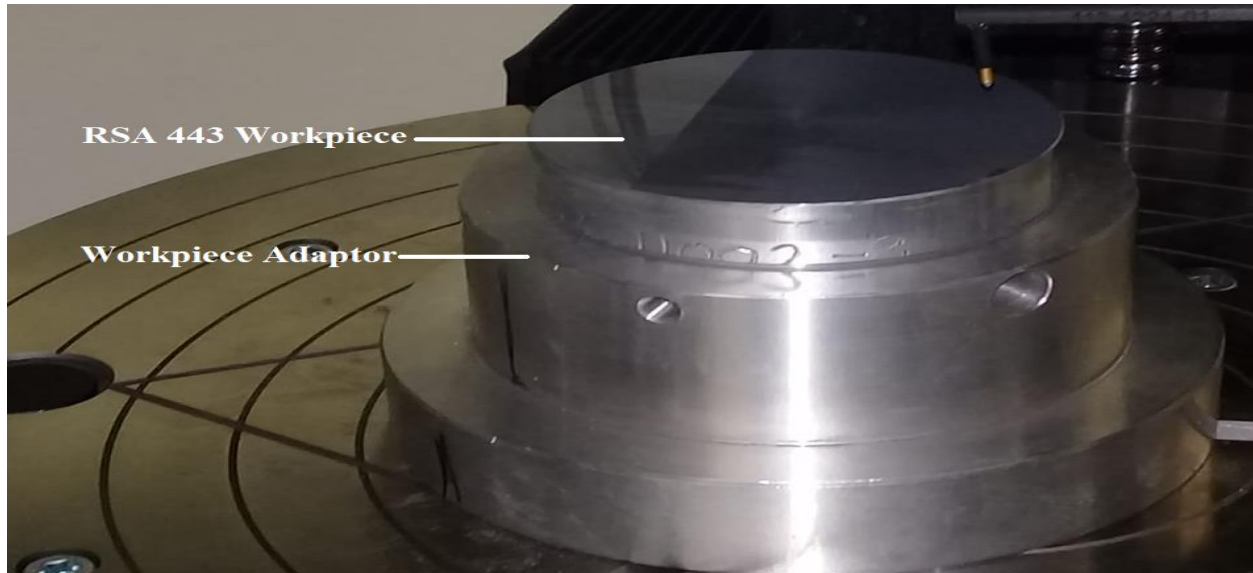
1: RSA 443 Workpiece Mounted on Aluminum Adapter Disk
